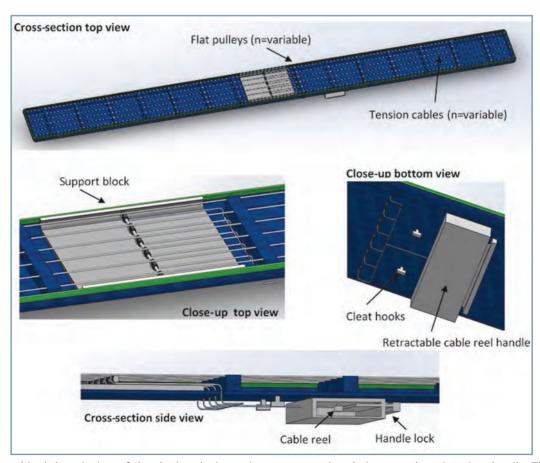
Graphical description of the device design using cross-sectional views to show interior details. The top-views show the flat pulleys, tension cables, and support block. The bottom view shows the cleat hooks and retractable cable reel handle. The side view shows a cross section of the cable handle detailing the handle lock mechanism.
